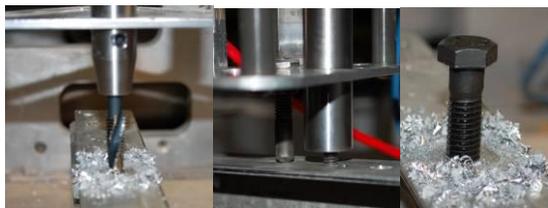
left to right – drill and tap, bolt tightening, installed bolt
